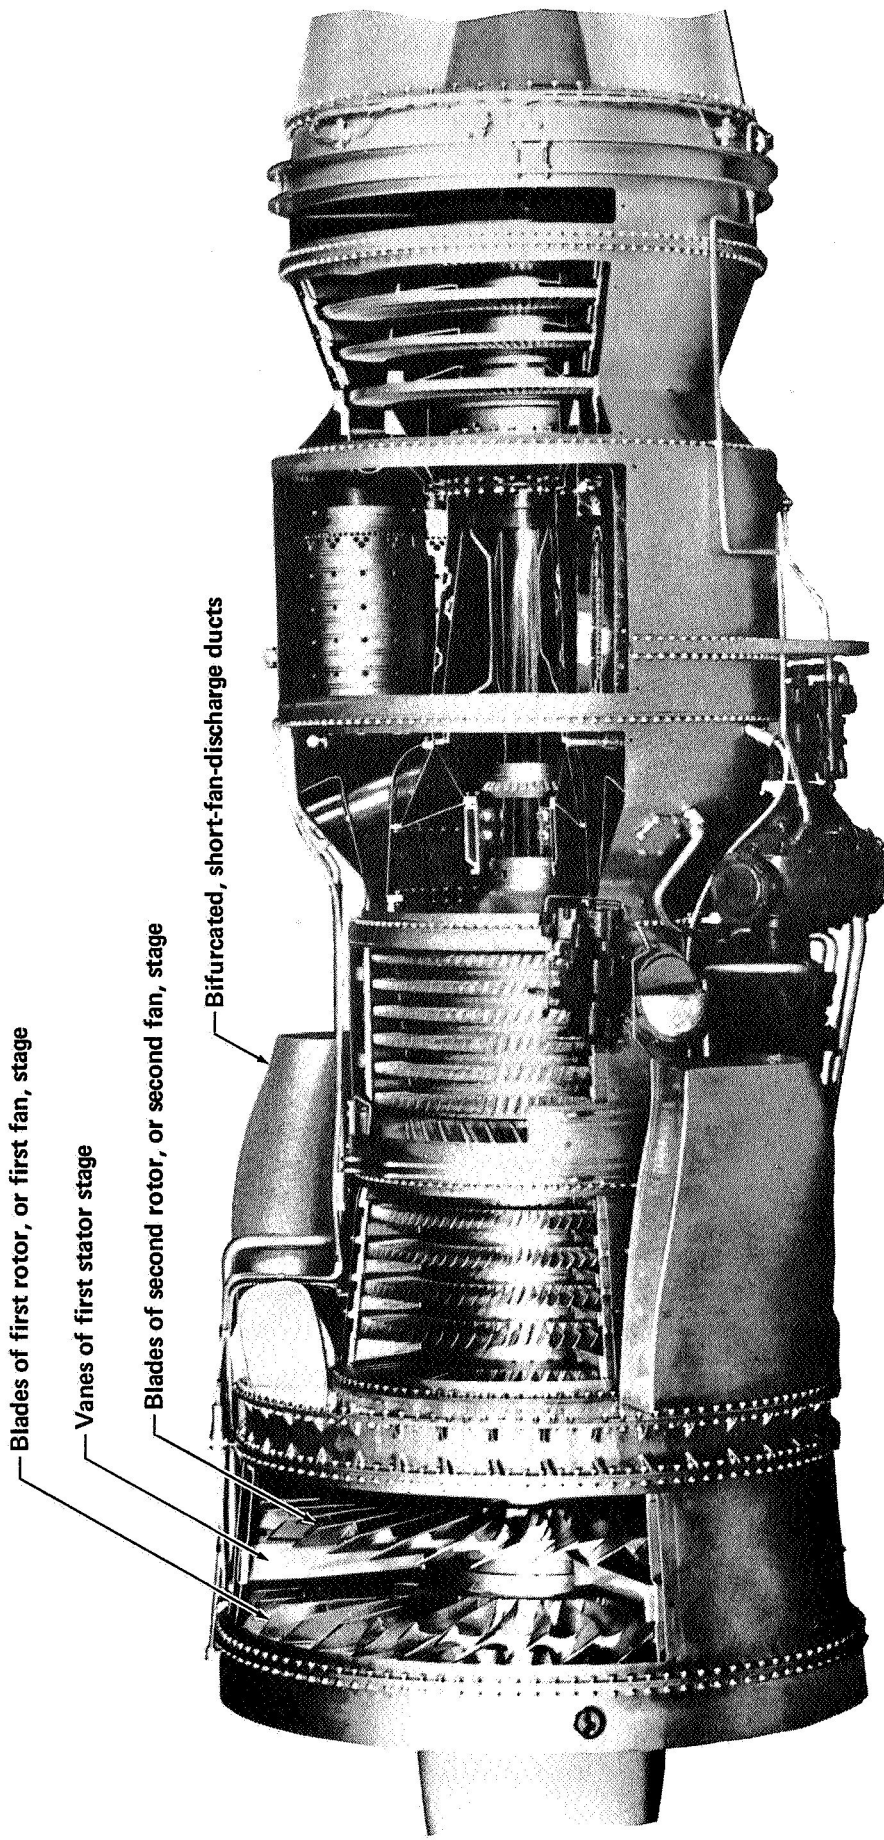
Cutaway view of Pratt & Whitney Aircraft JT3D turbofan engine.
